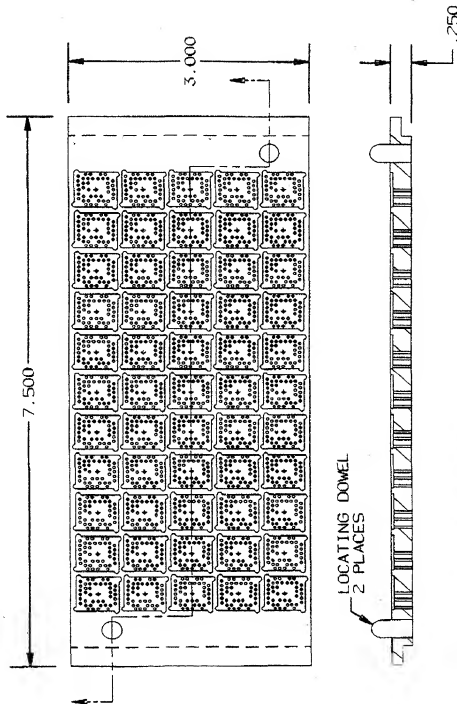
Typical multi-purpose carrier plate design for ceramic RGA packages. The carrier plate is used for the high volume method of die attach, lid seal and ball attach.
